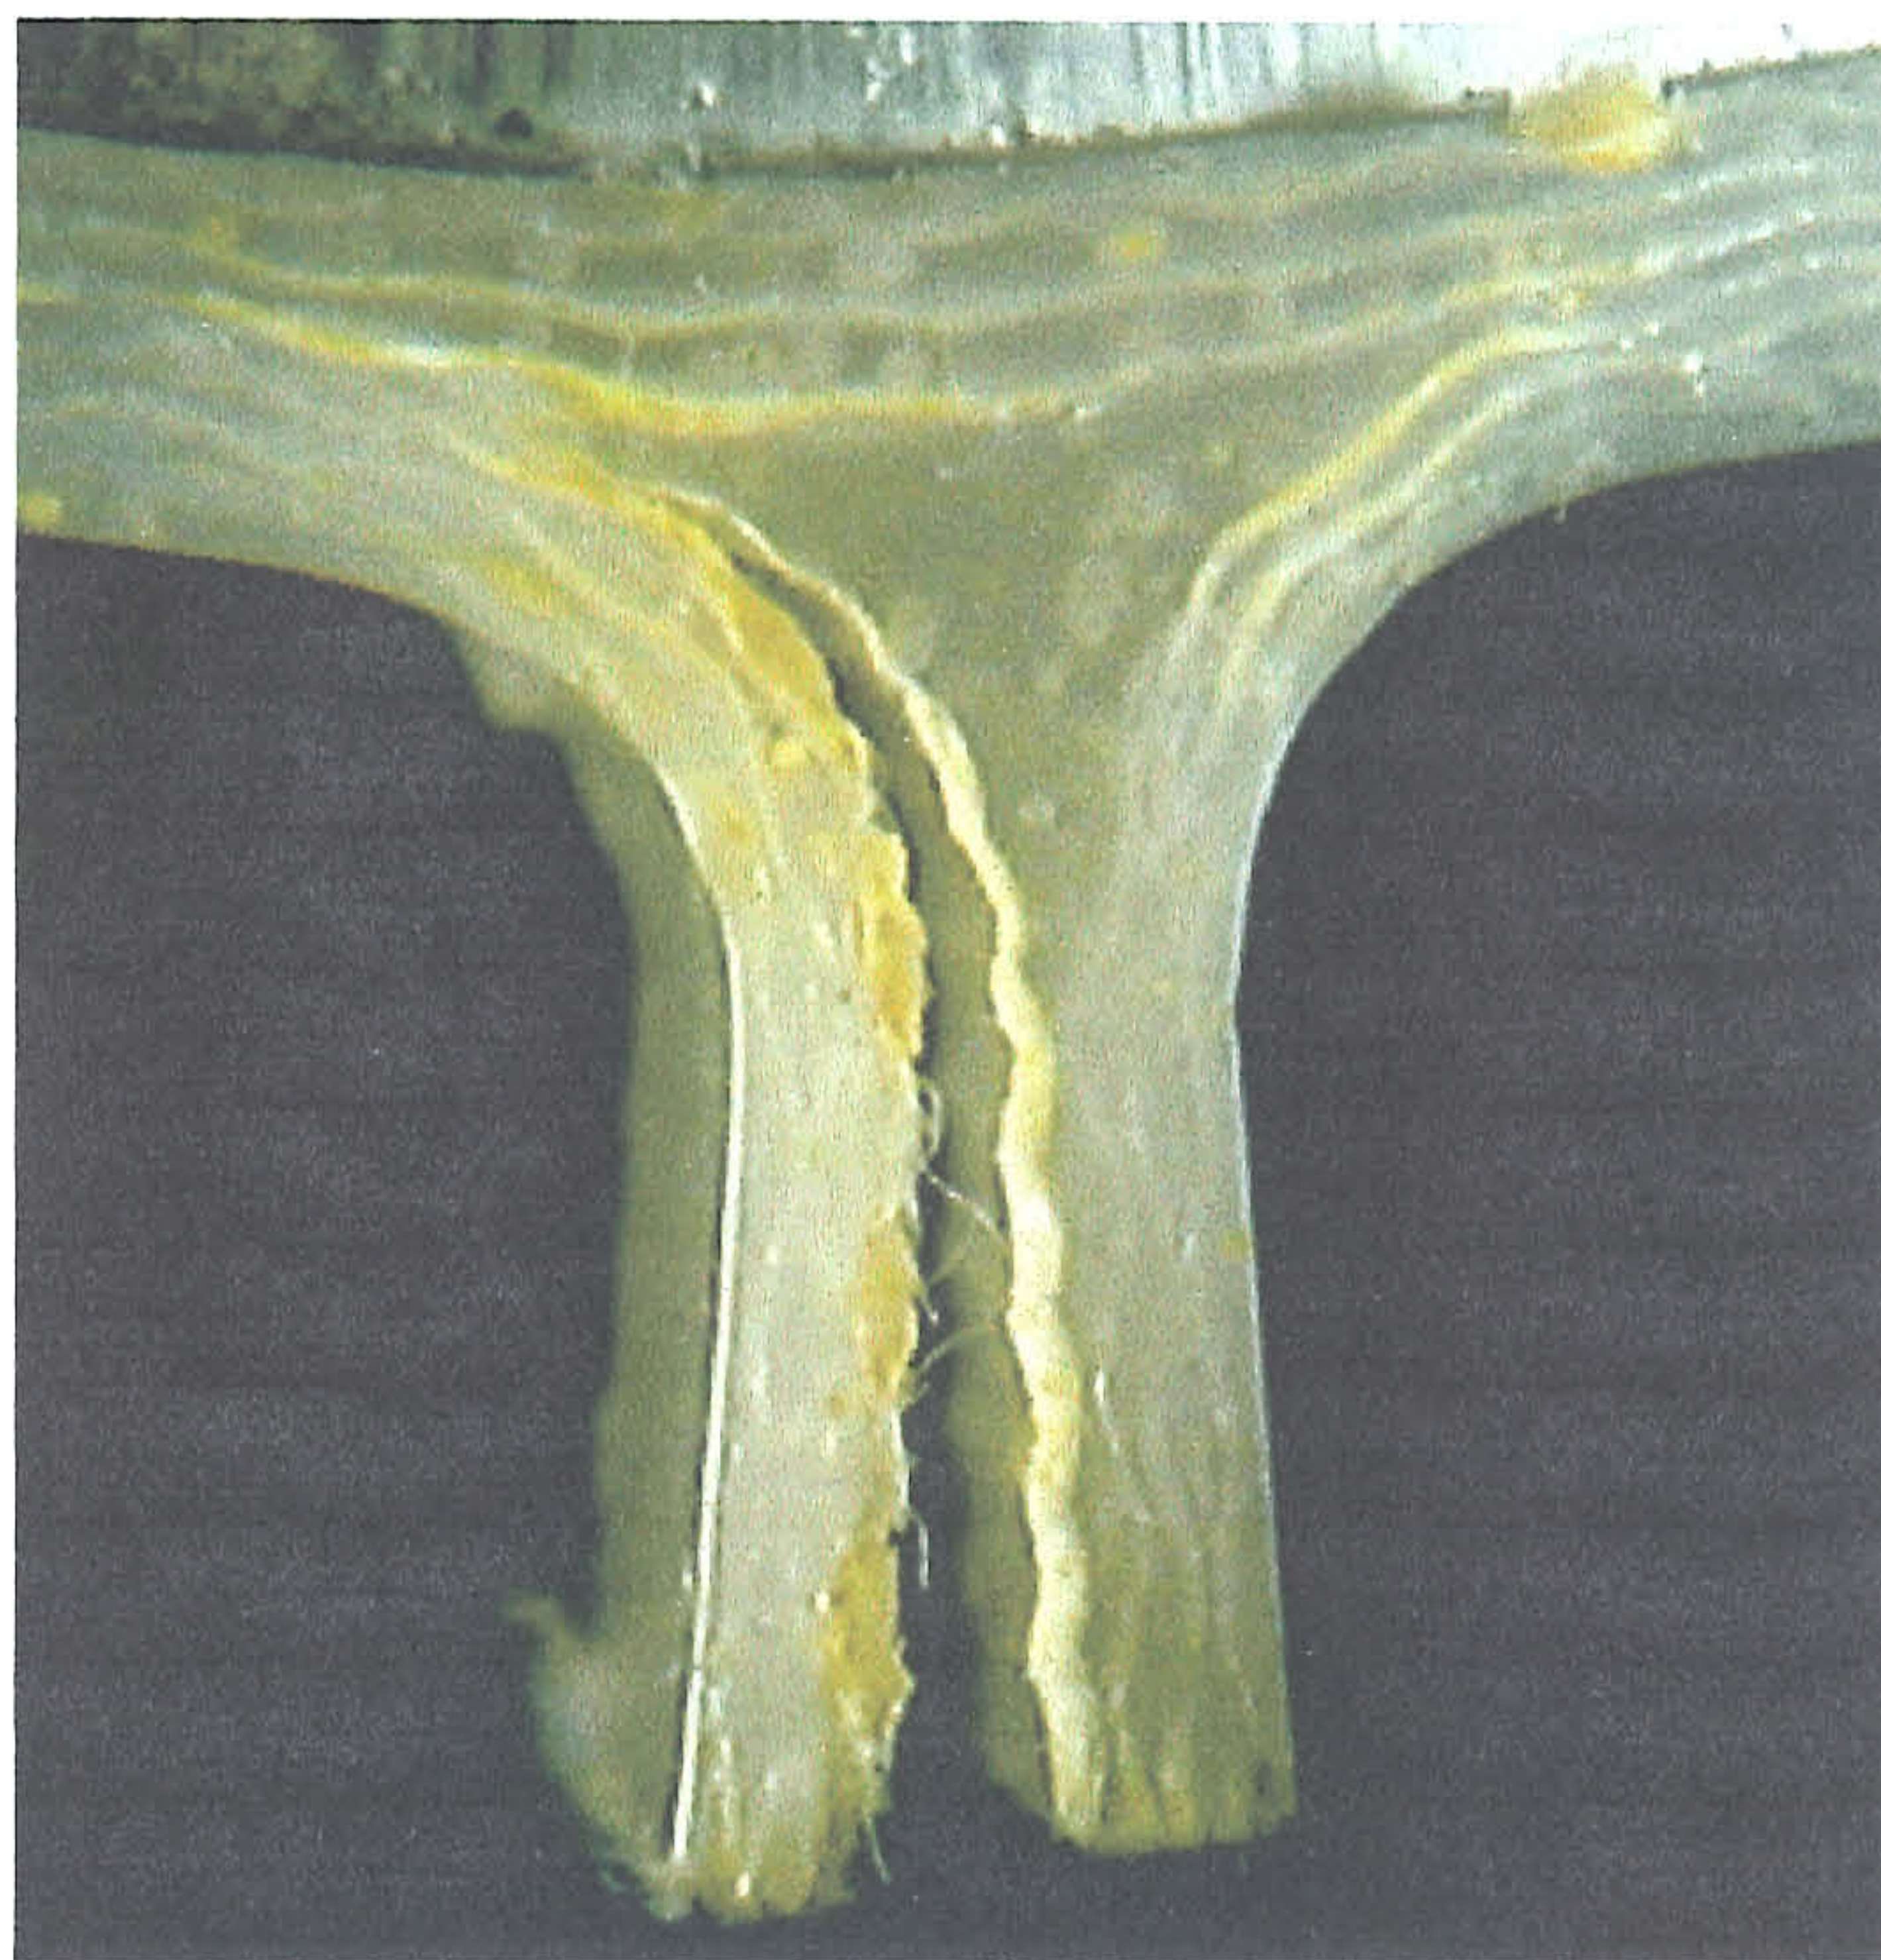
The delamination plane in the fillet of the T-shaped sub-structure with one-dimensional reinforcement.
